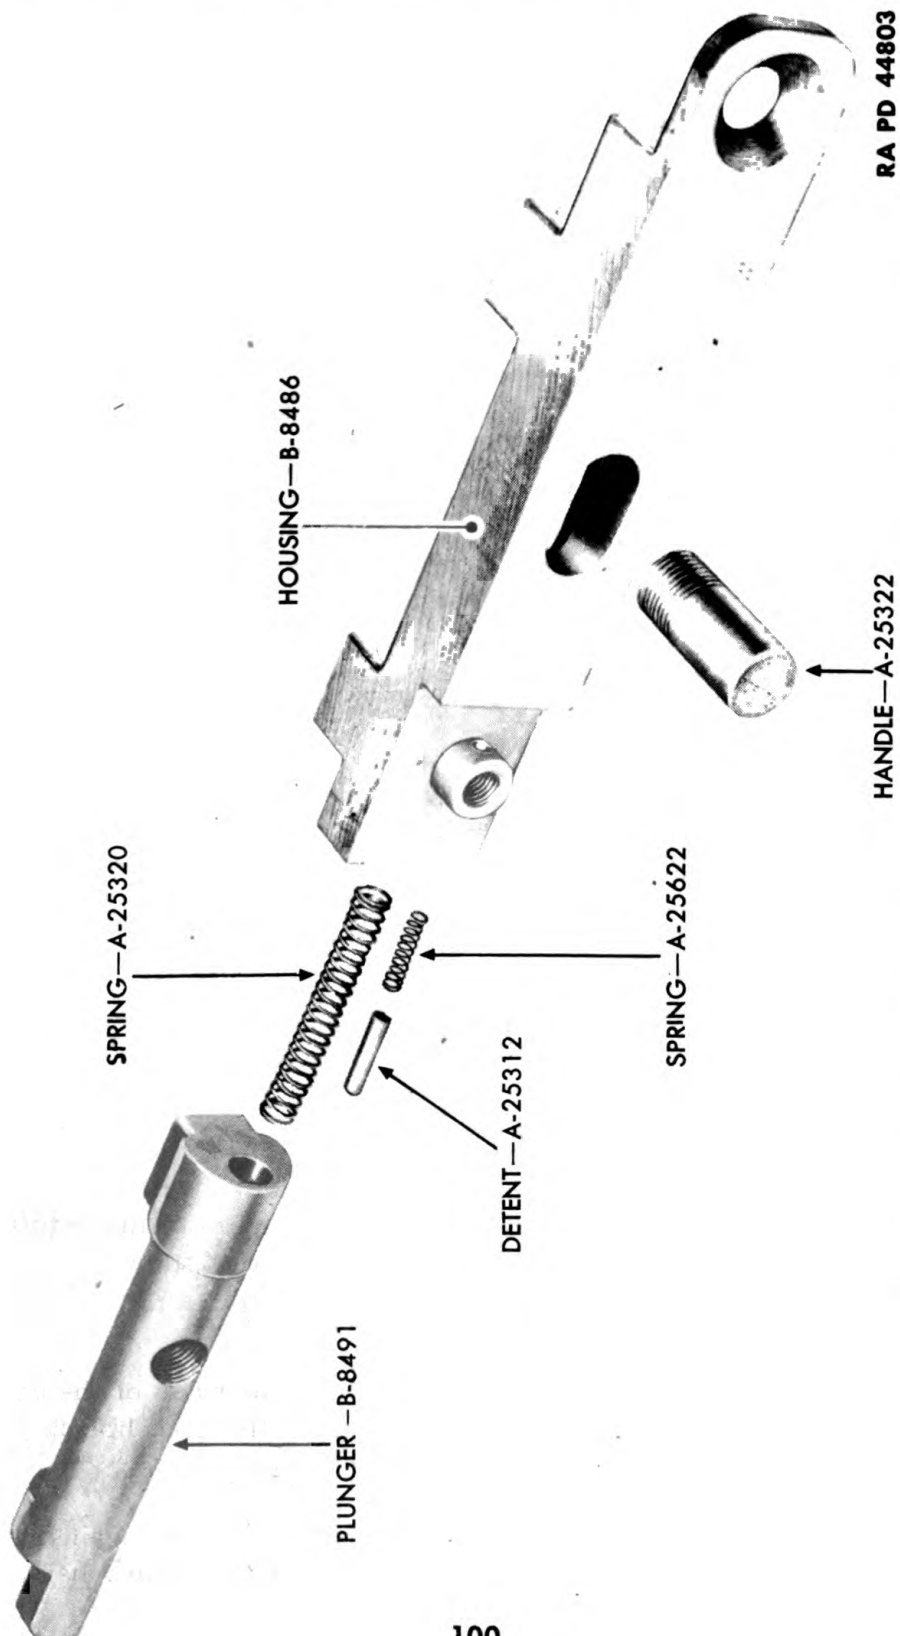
Firing Mechanism Safety Plunger Group—Exploded View
